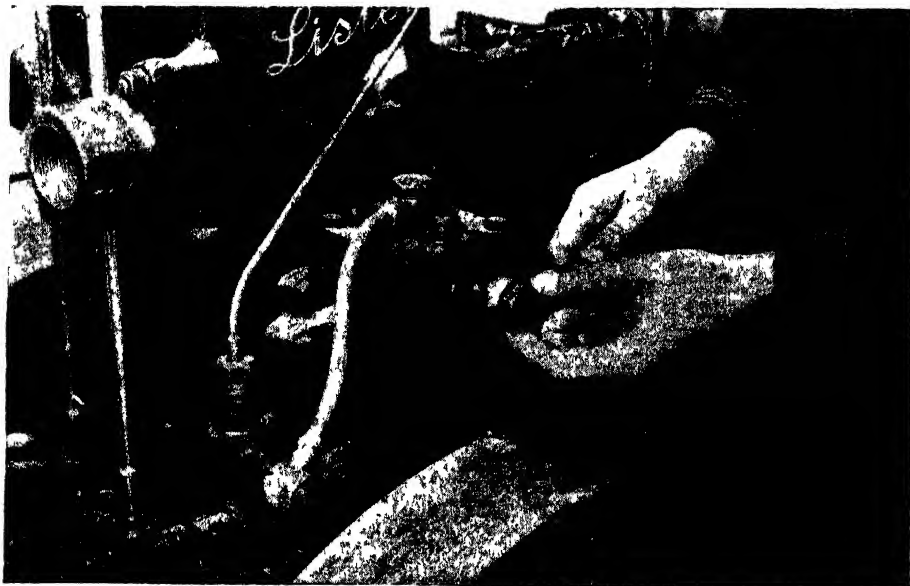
COUPLING FUEL PIPE TO FILTER ON ENGINE
